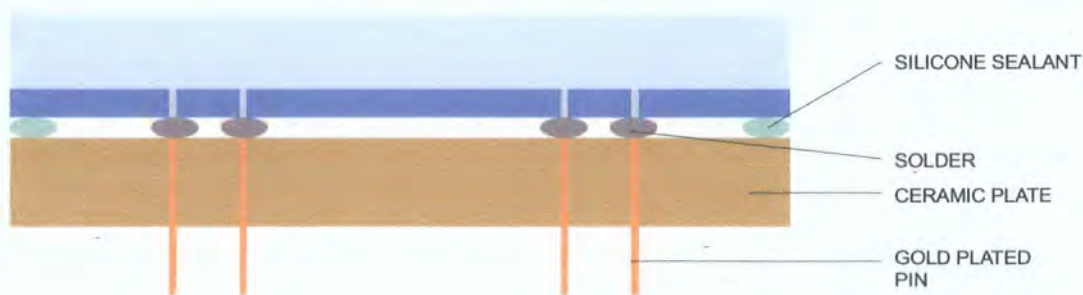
Ball Grid Array (BGA) type package. Contacts made between die and Au plated pins with solder.
